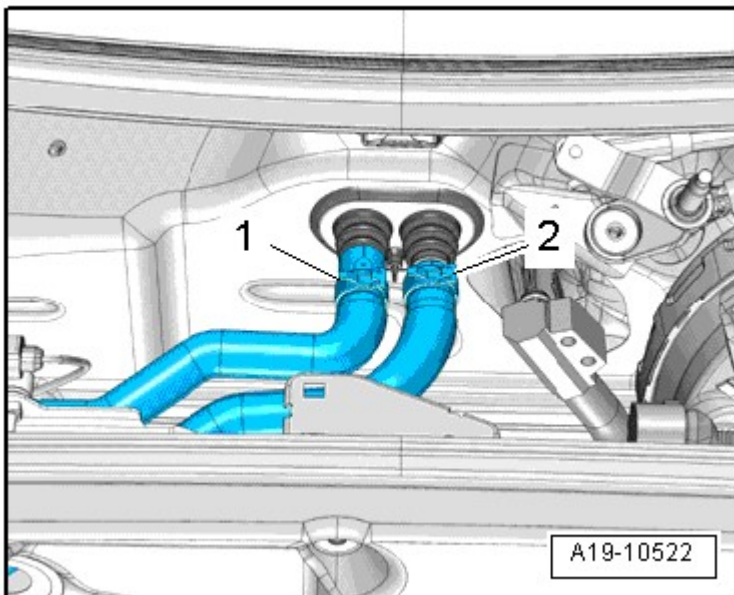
Identifying Clamp -2- And Remove Coolant Hose
